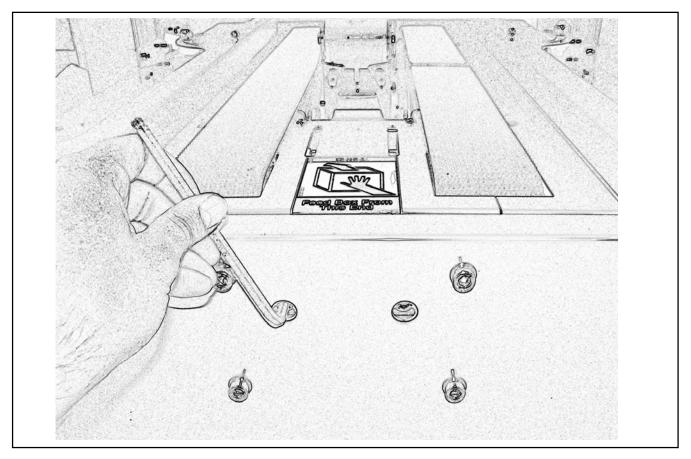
Box Drive Belt Tension Adjustment, Lower Belts (Infeed End)
